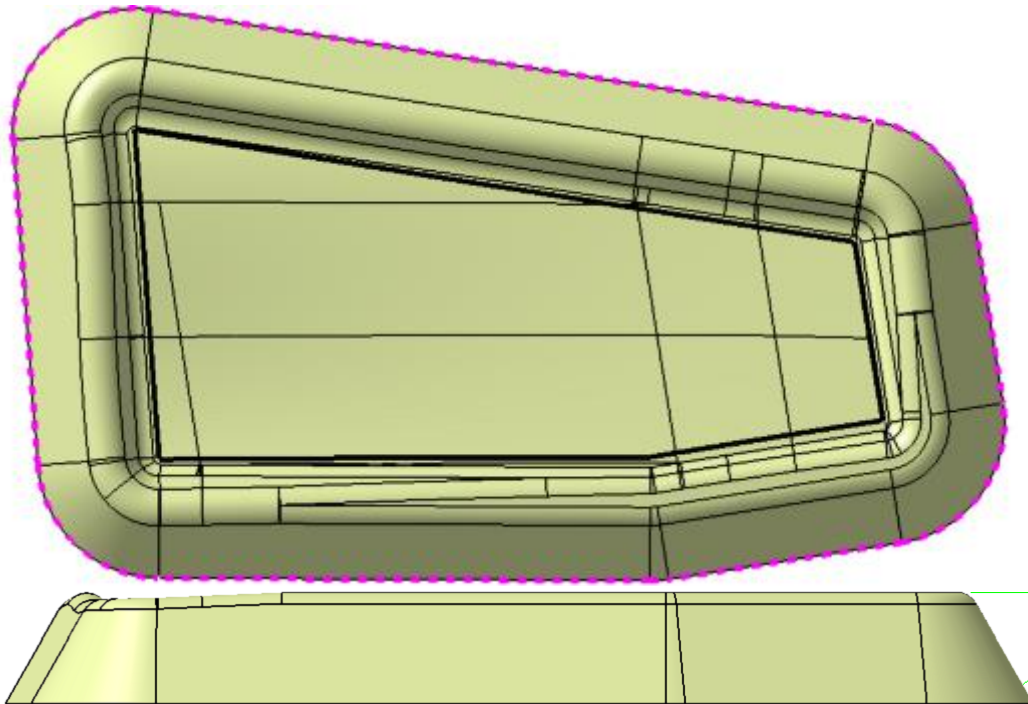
Concept-2 Tool and Blank – Top and Side Views
